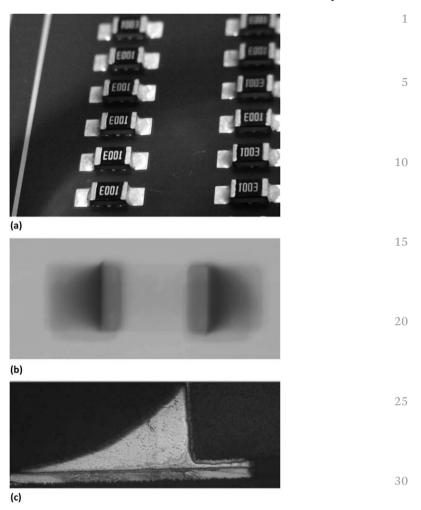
Tests data from pick and place surface mount assembly tests carried out at MTC (Coventry). Assembly carried out on an ENIG finished PCB token with components (size 2.5×2 mm) using a solder paste formulated from a mixture of 88.5 wt% SAC305 with a *Reline* based solder flux: (a) optical image, (b) X-ray microscope image and (c) optical image of a cross-section of the component joint (the PCB substrate is aligned on the bottom edge of the image).
